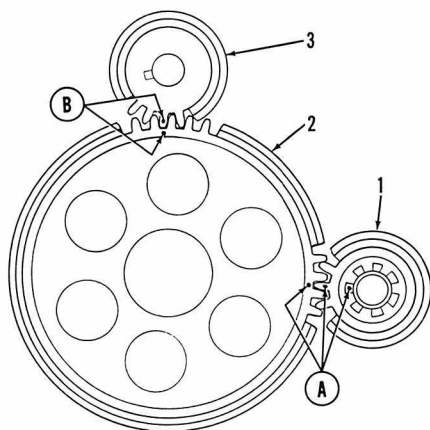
The crankshaft gear (1) must be installed on crankshaft splines with timing marks aligned. The three marks (A) on crankshaft, gear (1) and primary drive gear (2) should all be aligned when mark on alternator drive gear (3) is aligned with top mark on primary drive gear (2) as shown at (B).
